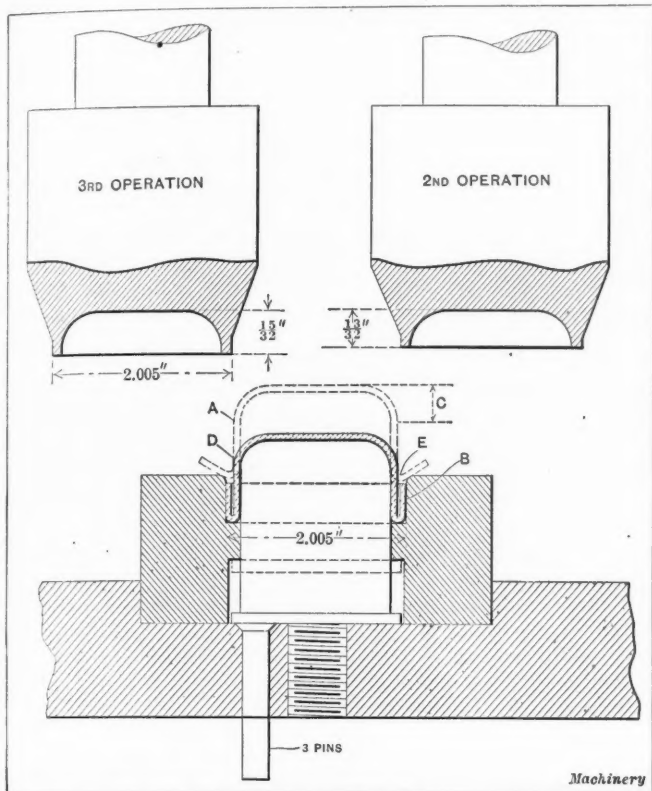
Punches and Die that proved Unsuccessful for the Drawing Operation
